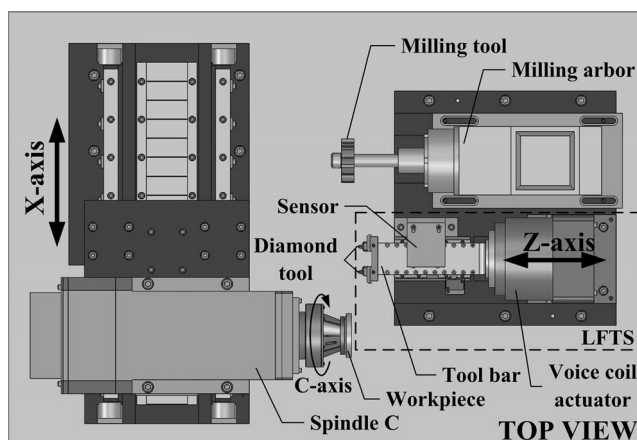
The structure layout of the T-base DTM with LFTS for surface machining of PAL
